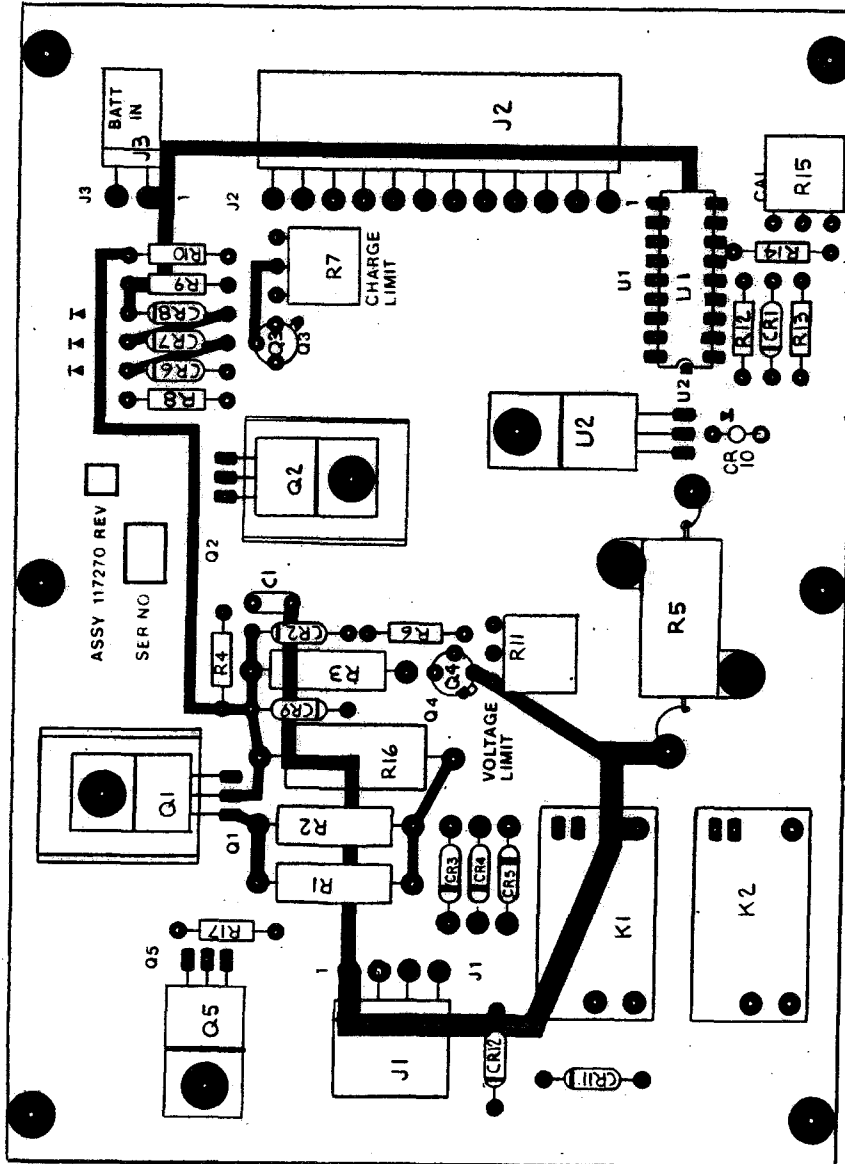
AS210-05 Standby Battery Charging Assembly
